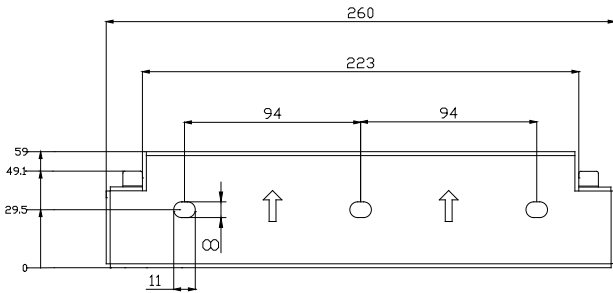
Dimensions of rear panel of R5-0.7K/1K/1.5K/2K/2.5K/3K-S1
